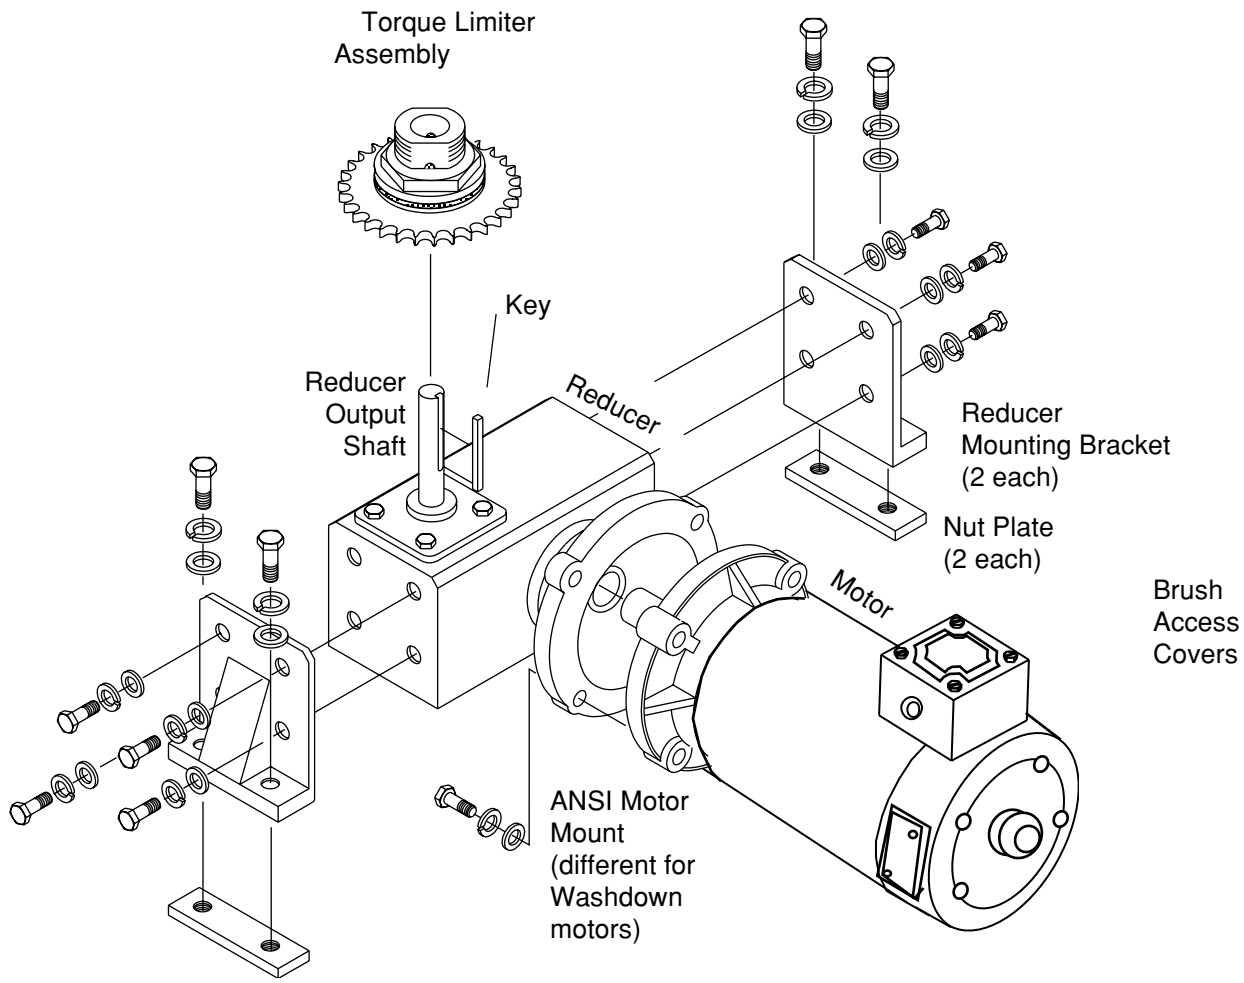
FT-40/50-RD Feeder Speed Reducer & Motor
